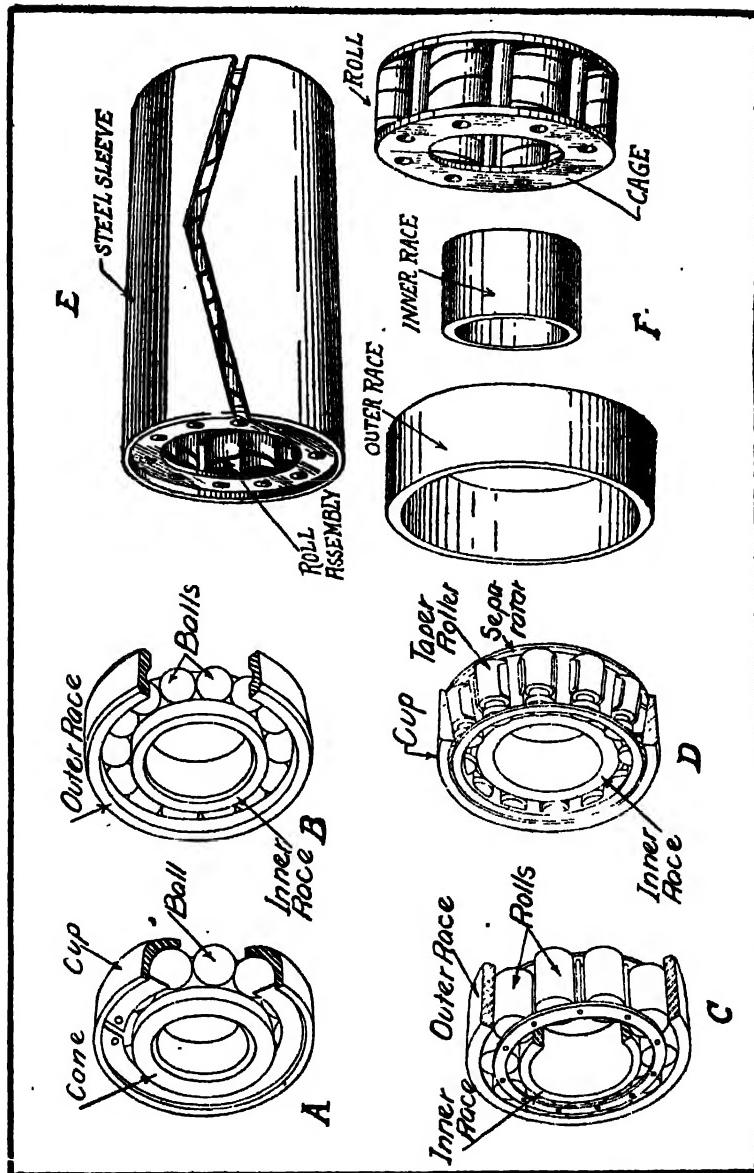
Outlining Conventional Types of Ball and Roller Bearings.
